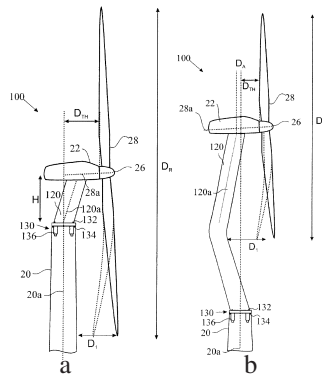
Inclined tower section with yaw bearing inside the tower by General Electric Company [144]
